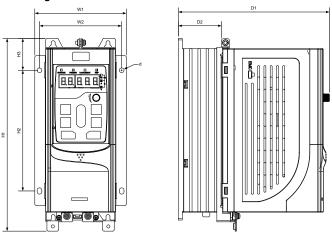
380V 1.5–7.5kW VFD flange mounting diagram
